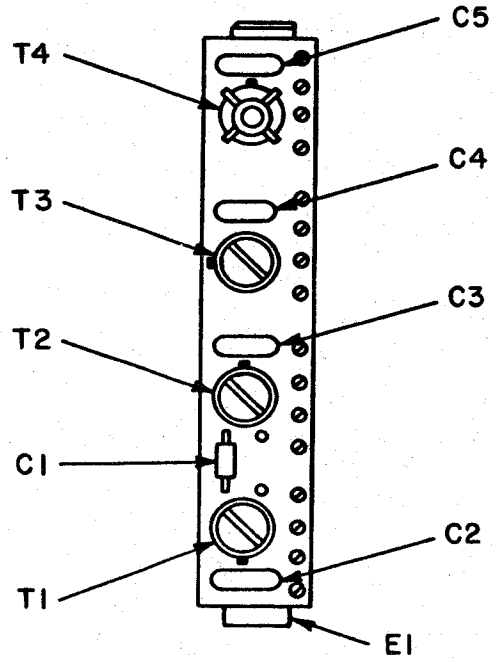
28 MHz Subassembly A2A4A18, Component Locations
